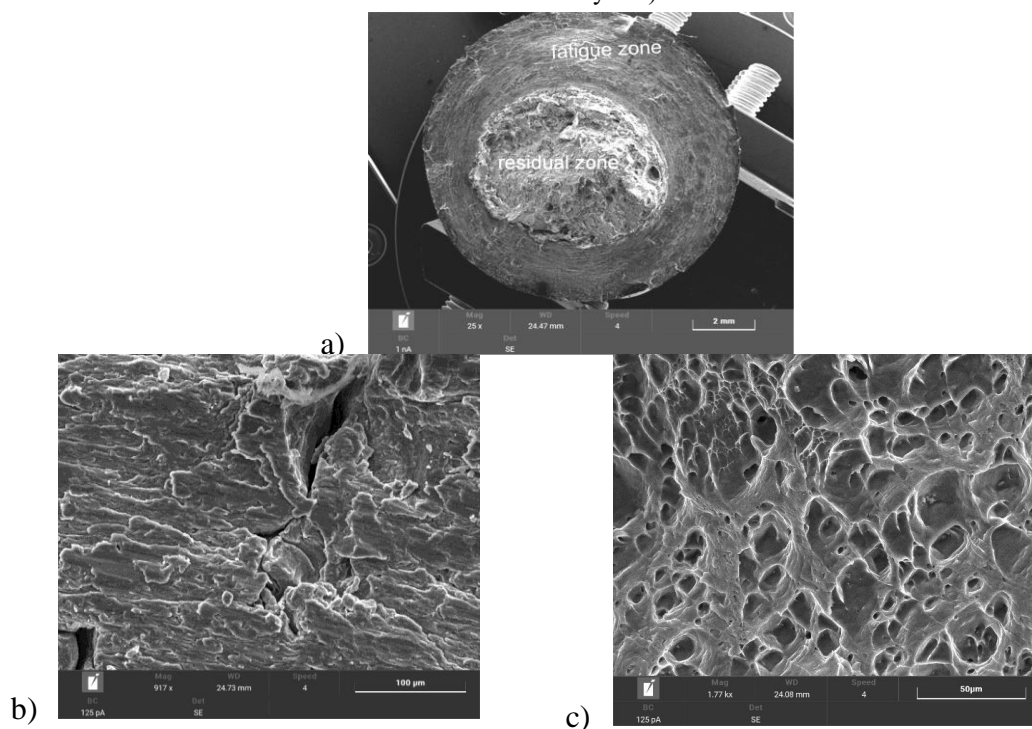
Fatigue fracture of the alloy after T64 treatment caused by torsion: a) fracture morphology, b) surface in the area of the fatigue zone, c) surface in the area of the residual zone (specimen 7 – 3 700 cycles)
